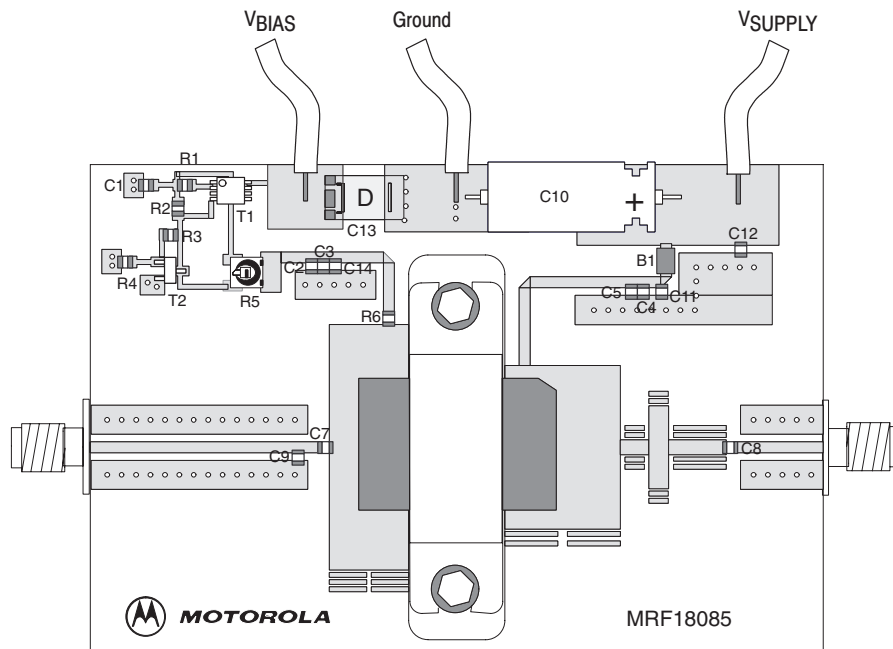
1.93 - 1.99 GHz GSM EDGE Optimized Demo Board Component Layout
